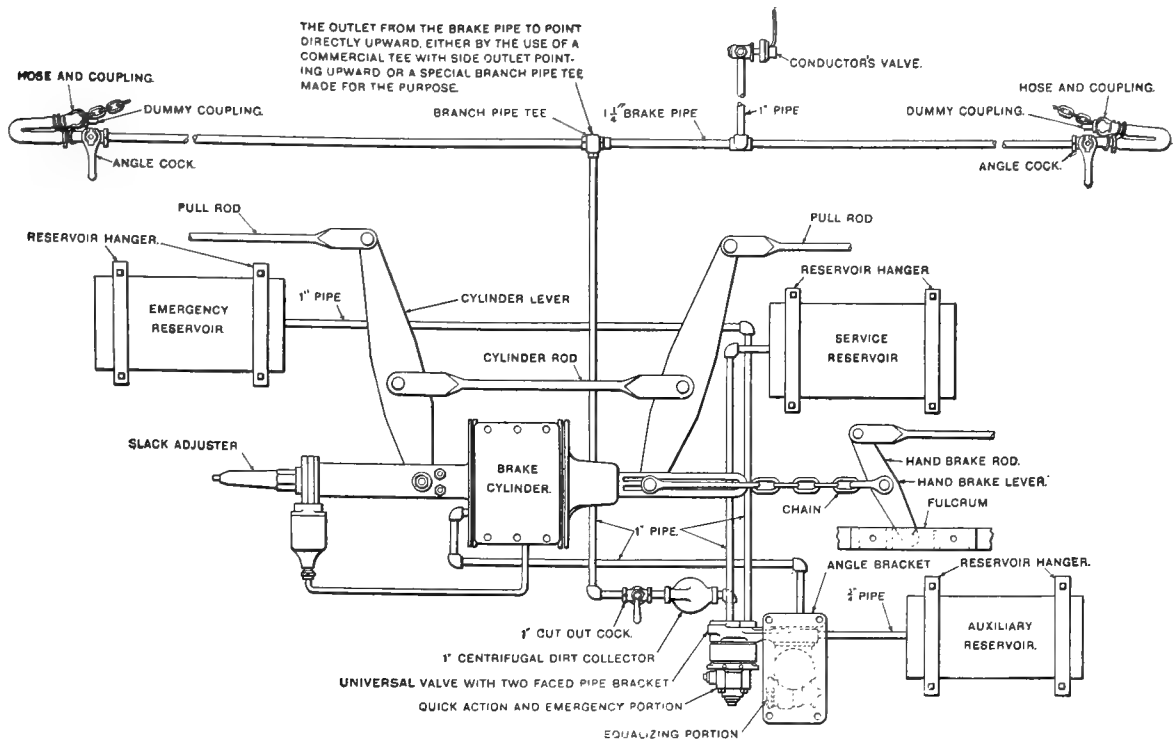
Piping Diagram of Universal Common Standard Brake Equipment, Schedule UC.
